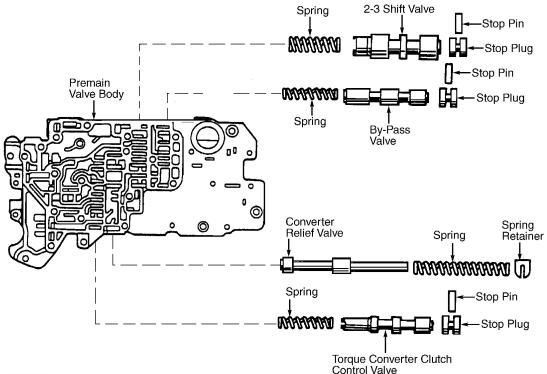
Exploded View Of Main Control Valve Body Courtesy of FORD MOTOR CO.
